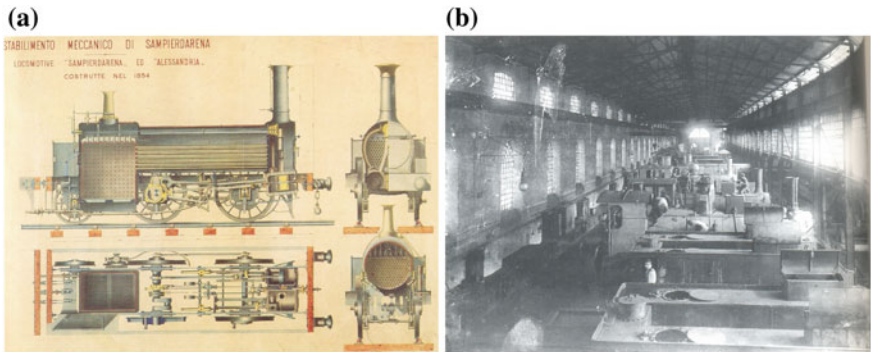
Locomotives by Ansaldo company: a design of the locomotive Sampierdarena, in 1855; b construction of locomotive FS290 and FS870 in 1907
